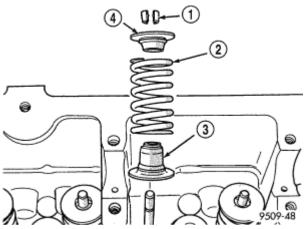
Valve Seal/Valve Spring Seat Assembly Courtesy of CHRYSLER LLC
